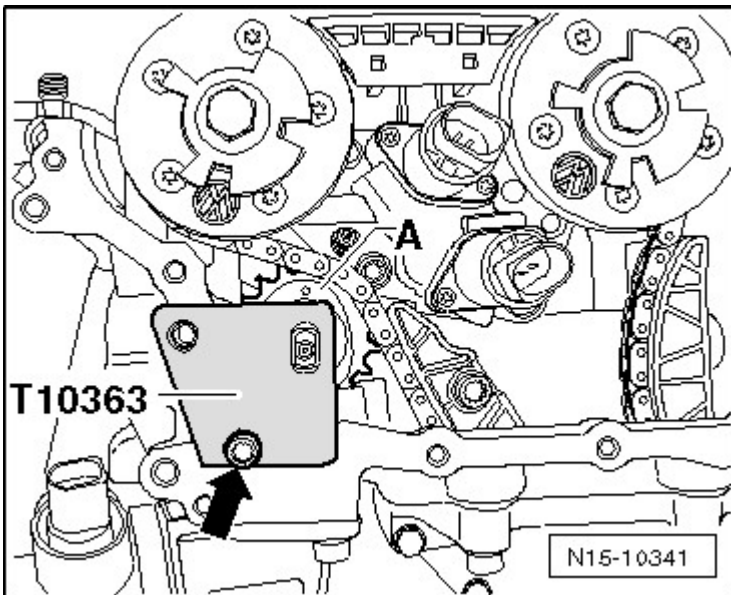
Securing Position Of Drive Pinion For High Pressure Pump Using Adjustment Tool T10363
